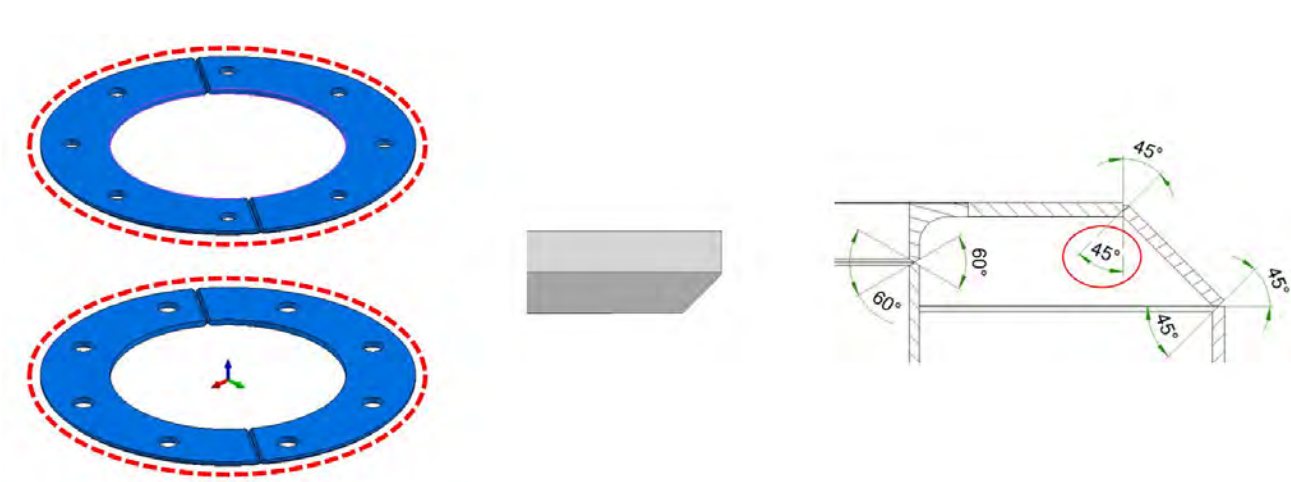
Bevel preparation for the welds to cones
